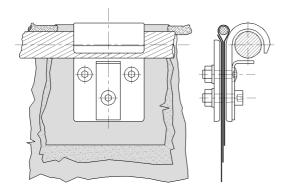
Hook protecting against overload (based on sketch M. Fiuk)
